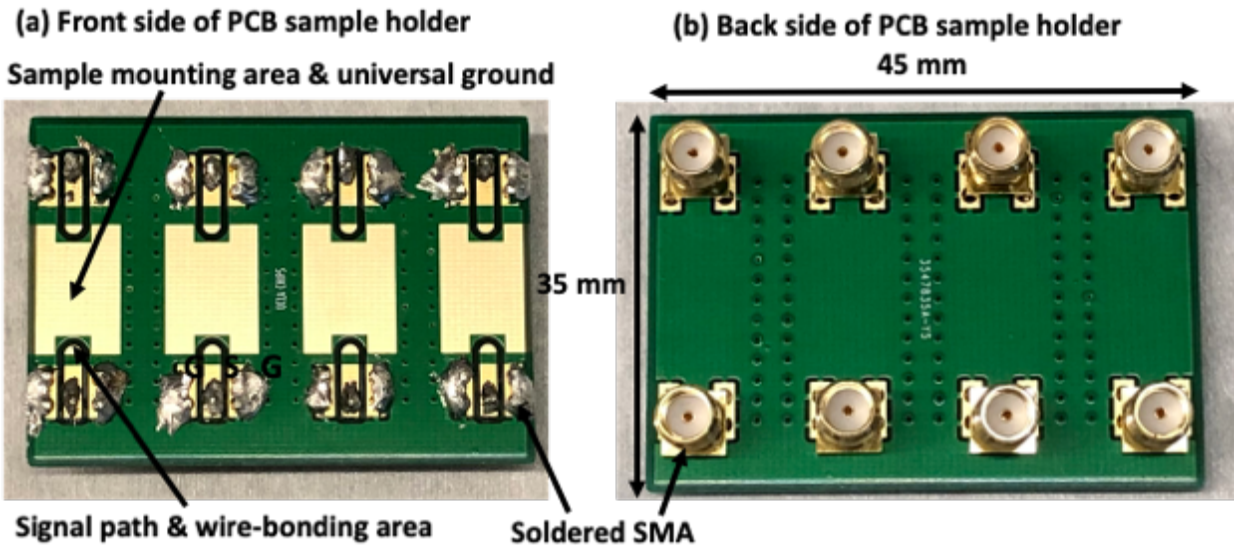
Two-layer FR-4 PCB carrier with a sample mounting area, signal path and wire-bonding 50  $\Omega$  traces, out-of-plane SMA soldering area, and an universal ground. Test die and IF design.
